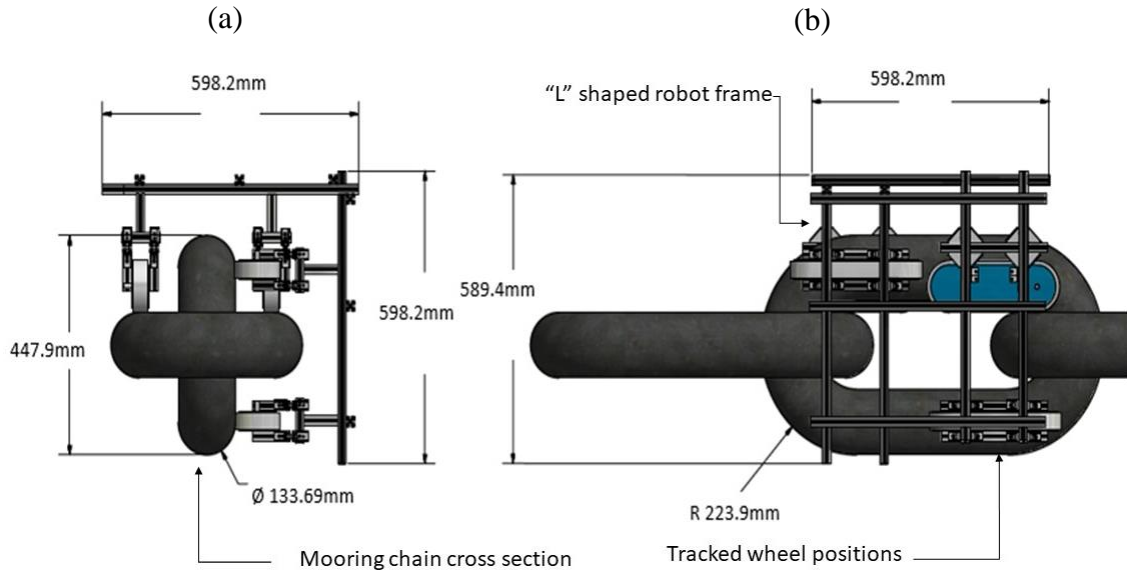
Tracked-wheel robot design and placement on the chain; (a) cross-section view; (b) side view of the design
